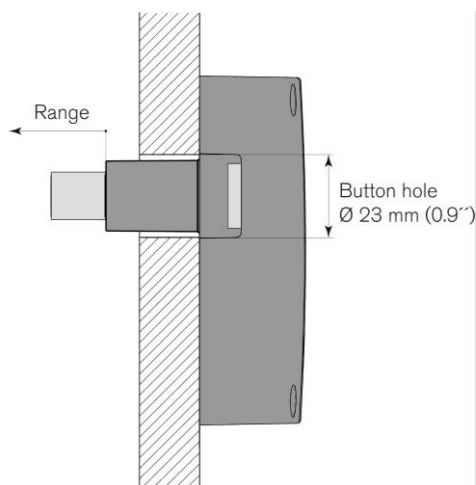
Diameter of the button drill hole for non-metallic doors
